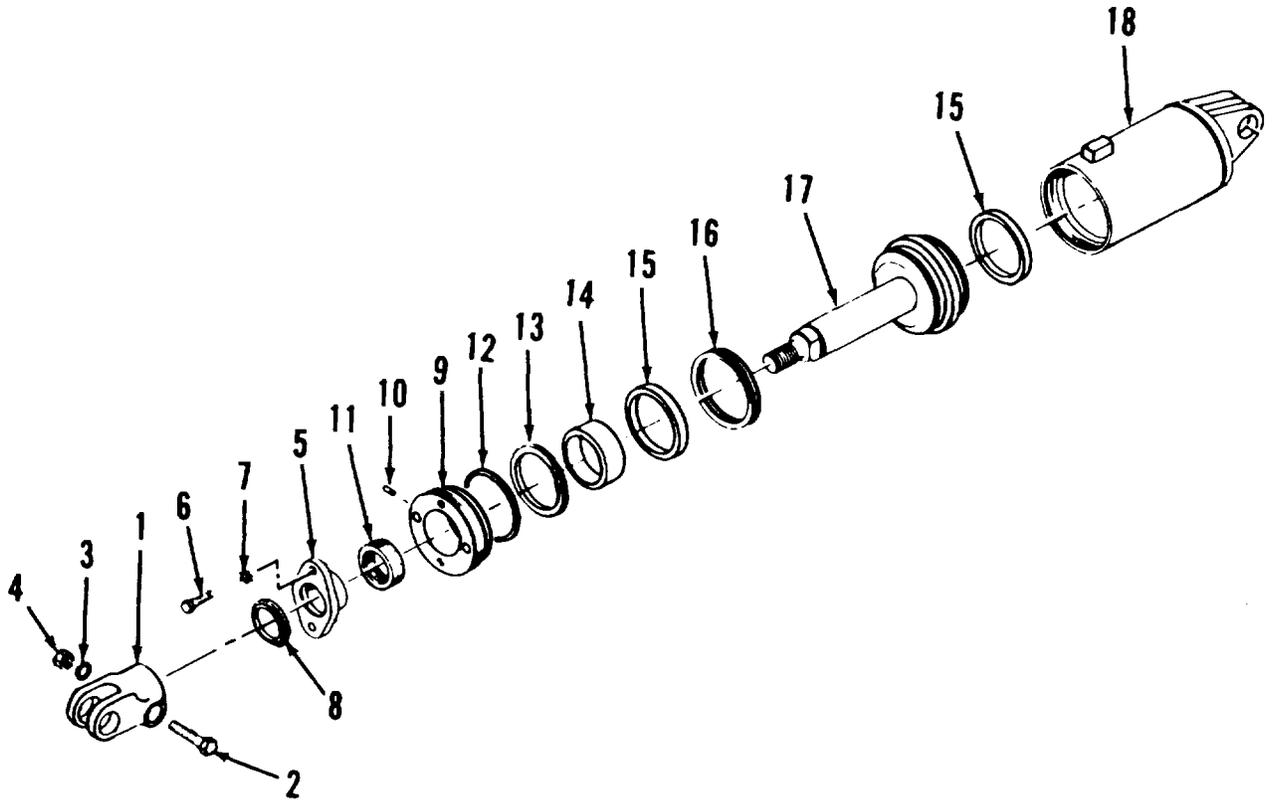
Cylinder Assembly, Actuating, Linear, Tilt
